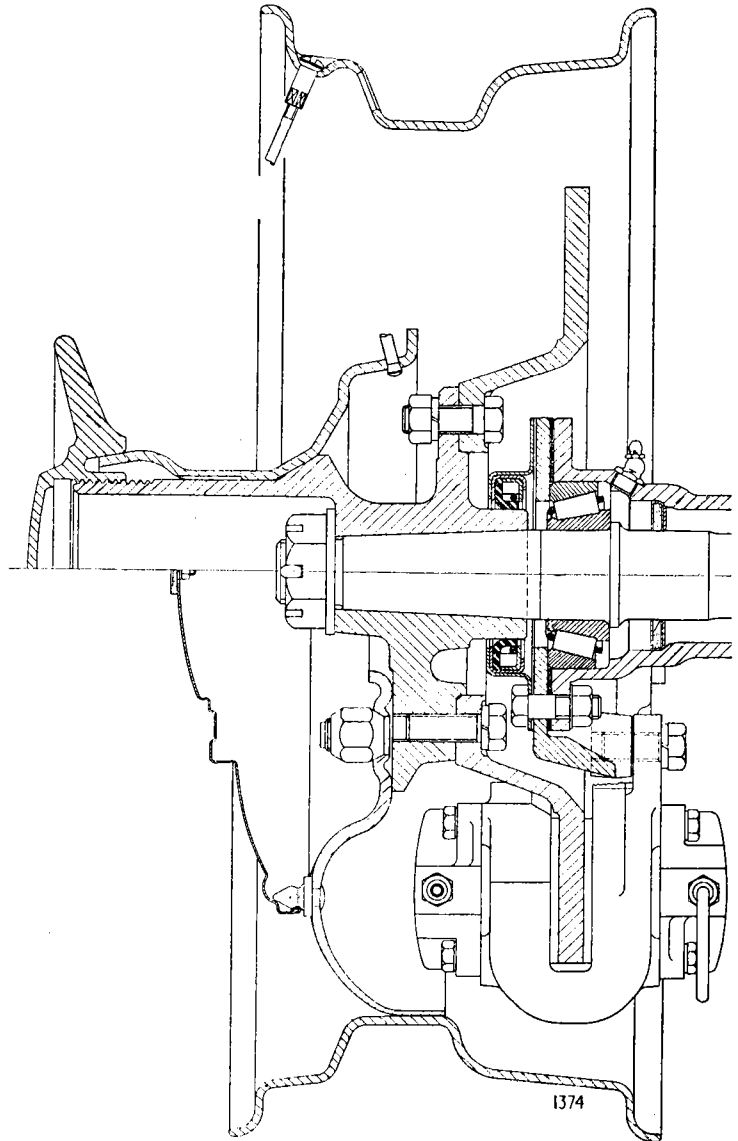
Sectioned plan view of the disc brake hub arrangement. The upper half of the illustration shows a wire spoke wheel hub; the lower half shows a disc wheel hub.
